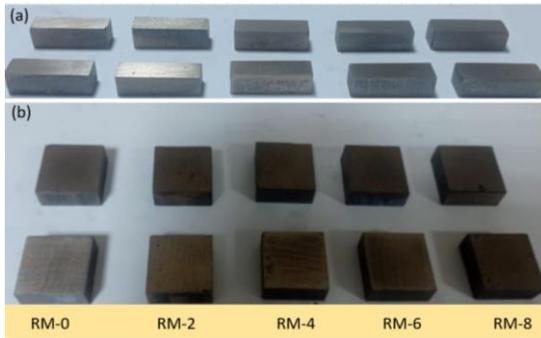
Produced by hot pressing process: (a) Three-point bending test samples, (b) Friction-wear test samples
